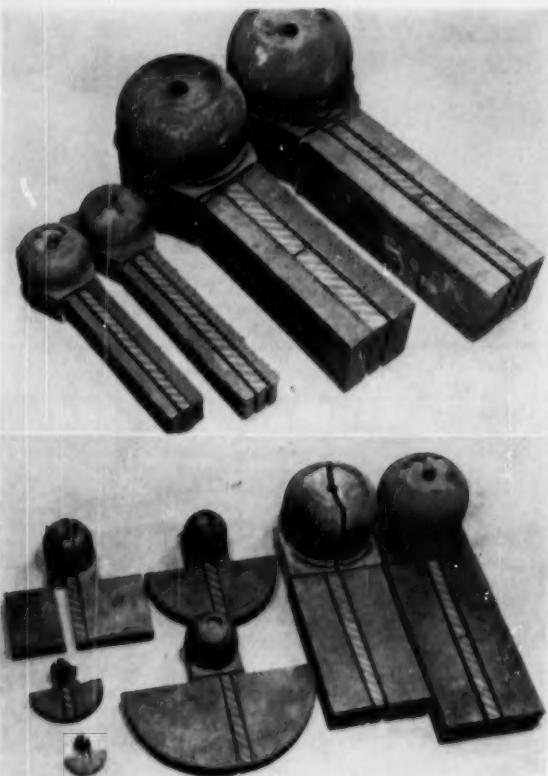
Bar castings (above) and plate castings (below) used to make feeding distance measurements.
